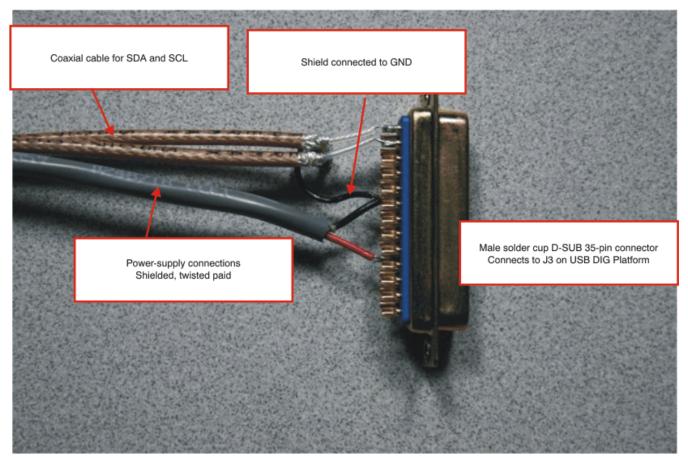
Shielded Cable Build on Solder Cup D-Sub
